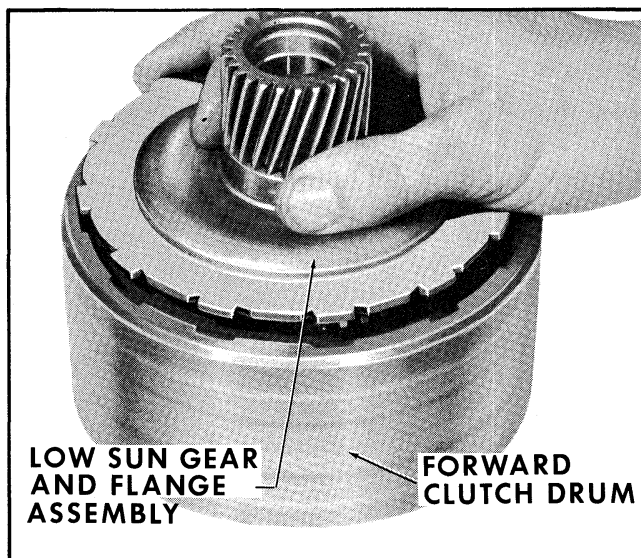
B-71 Removing Low Sun Gear and Flange Assembly
